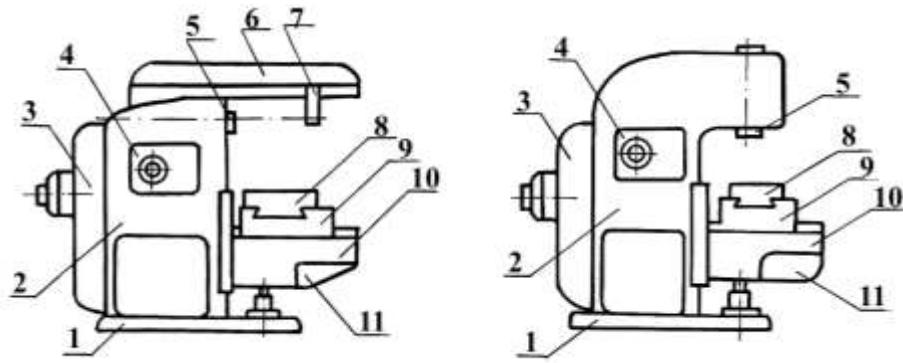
Horizontal (a) and vertical (b) milling machines: 1-base; 2-column; 3-electric motor with belt transmission; 4-spindle speed gear box; 5-horizontal or vertical spindle; 6-overarm; 7-outer arbor support; 8-table; 9-slide; 10-knee; 11-feed gear box
